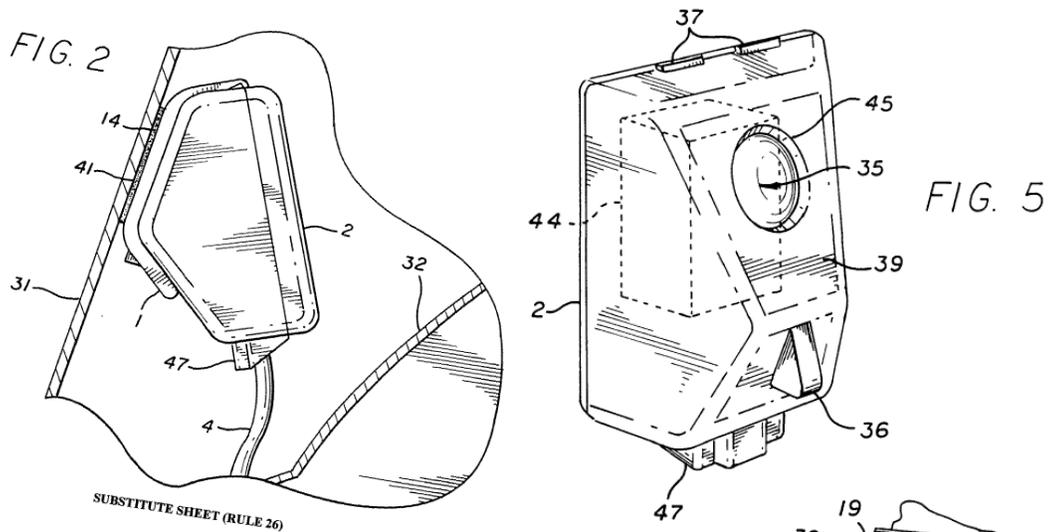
is a side view of an embodiment of an optical assembly. Figure 5 is a front perspective of optical device 2.
